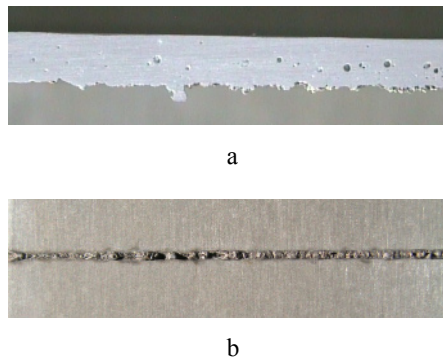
Porosity (a) and inverse form (b) of weld by welding process one
